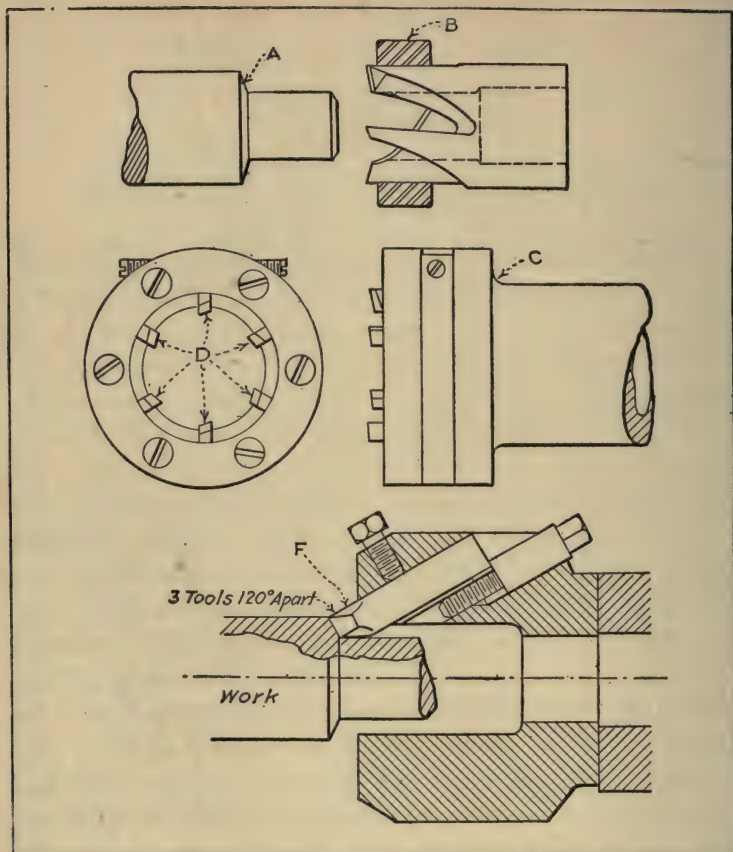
SEVERAL TYPES OF HOLLOW MILLS
